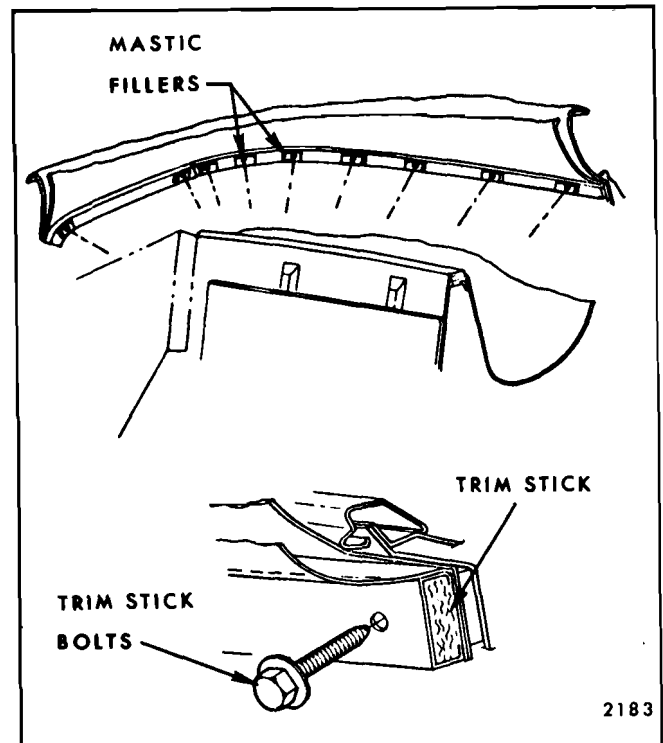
Checking Trim Stick Fillers - "F and Z" Styles
